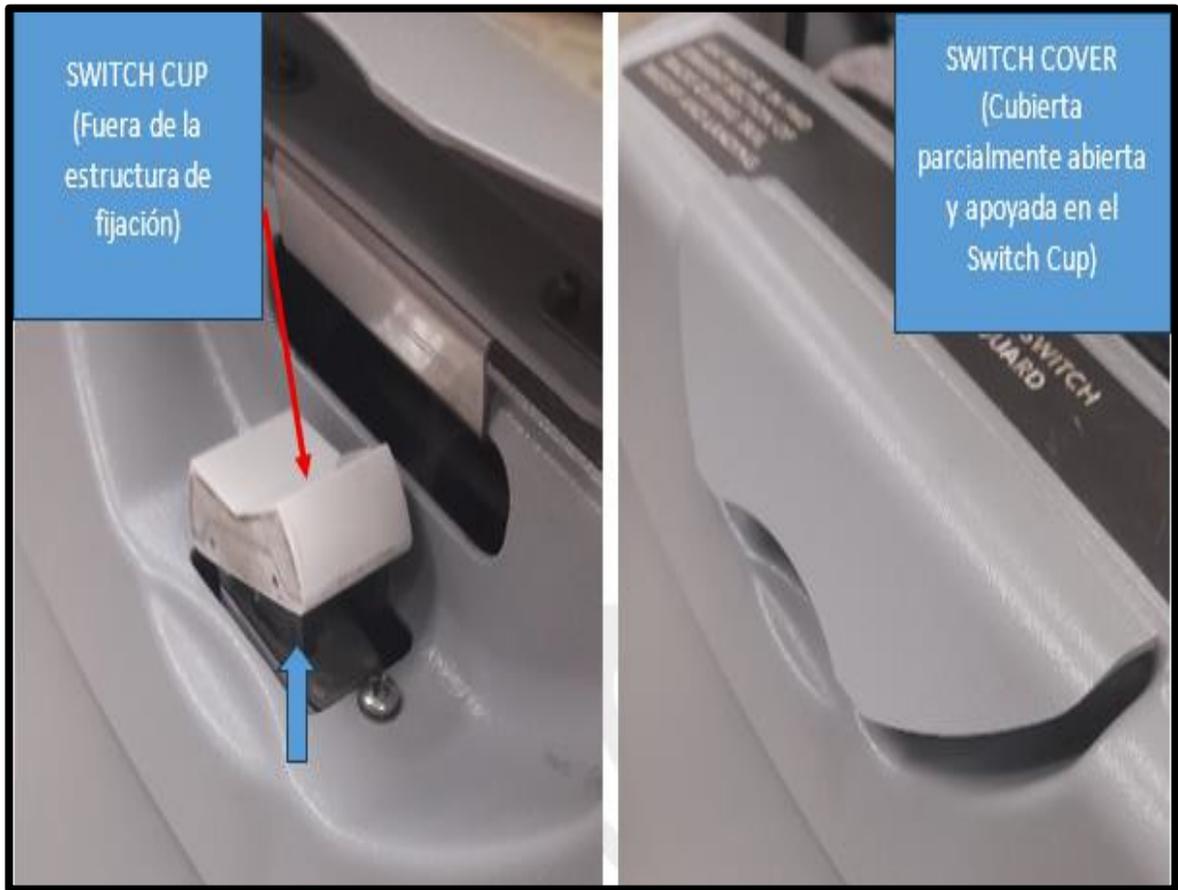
View of the ROCKER SWITCH Assembly during the inspection.
